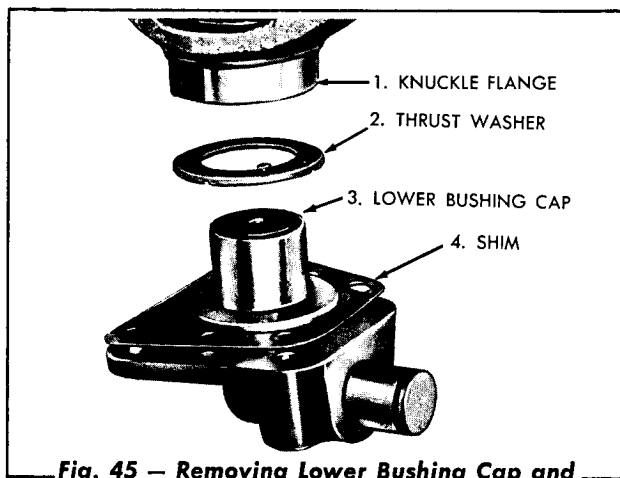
Removing Lower Bushing Cap and Thrust Washers
